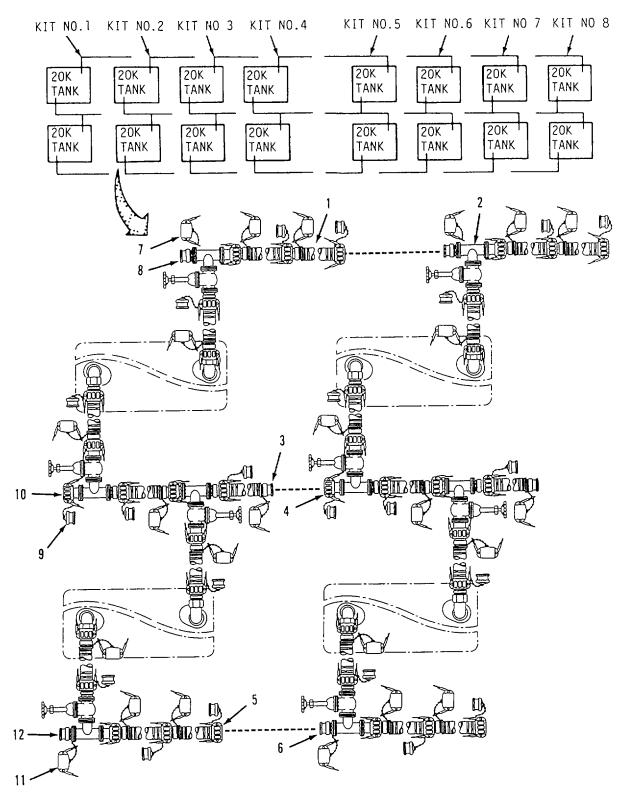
Dual Tank Connection Kit Disassembly (Sheet 2 of 2).
